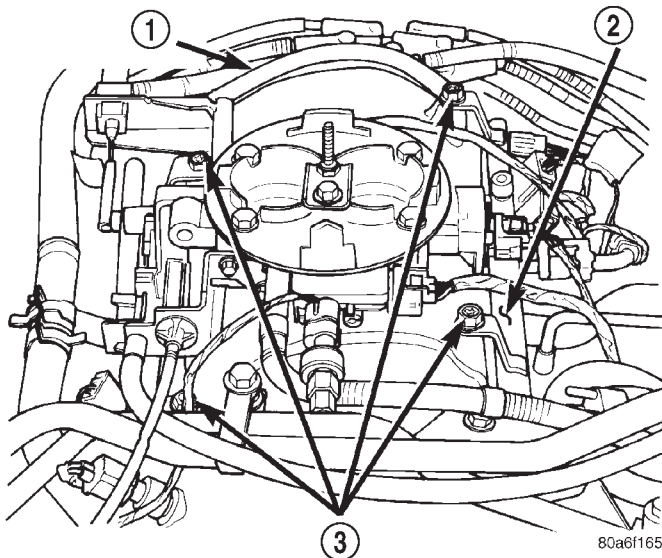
Fuel Rail Assembly—3.9/5.2/5.9L Engine—Typical
